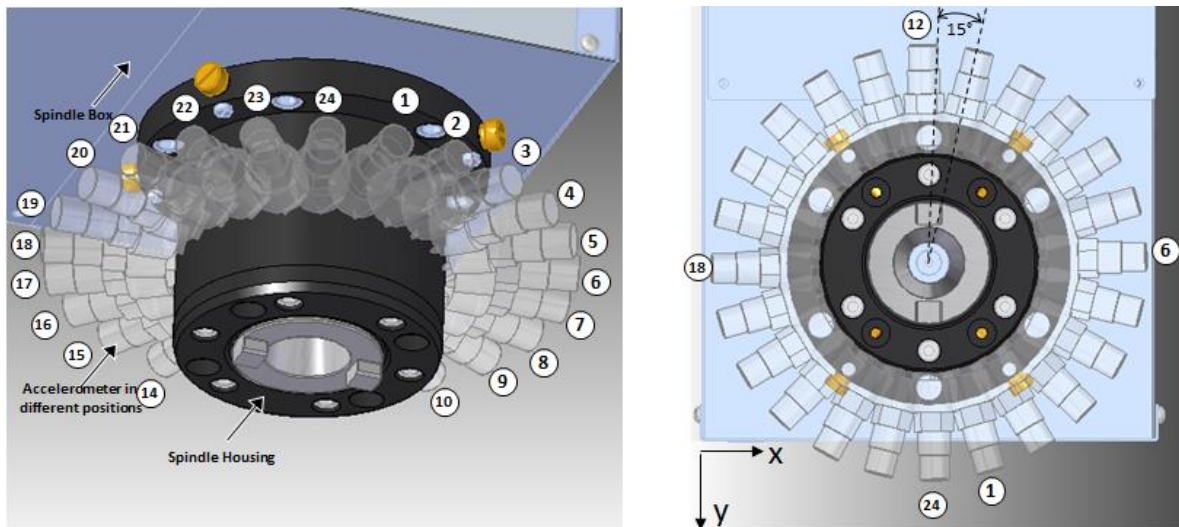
Setup 2 varying the position of the accelerometer radially along the spindle housing of machine B
